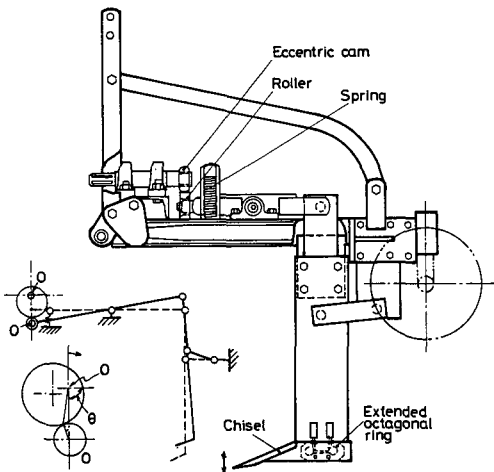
Remodelled subsoiler No. 2. Cutting directional angle is adjustable for -90°
